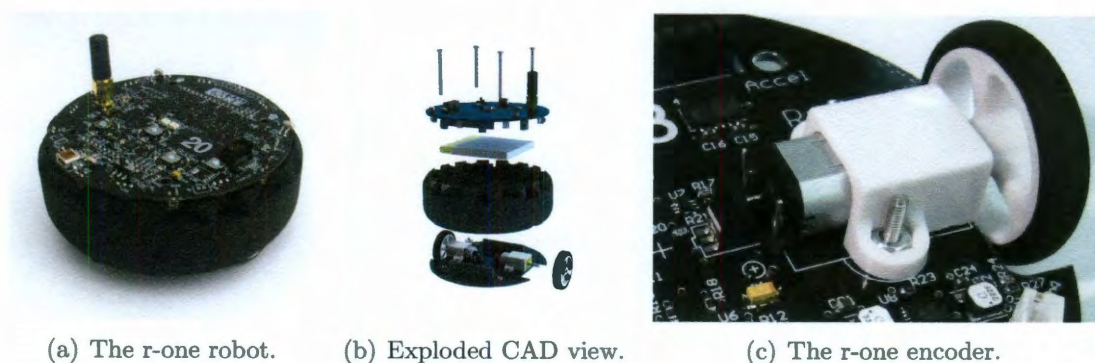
a: The r-one robot. b: Exploded CAD view of the robot assembly. The robot is composed of two circuit boards bound together with a circular shell and four screws. c: The motors and encoders mount directly to the circuit board.
